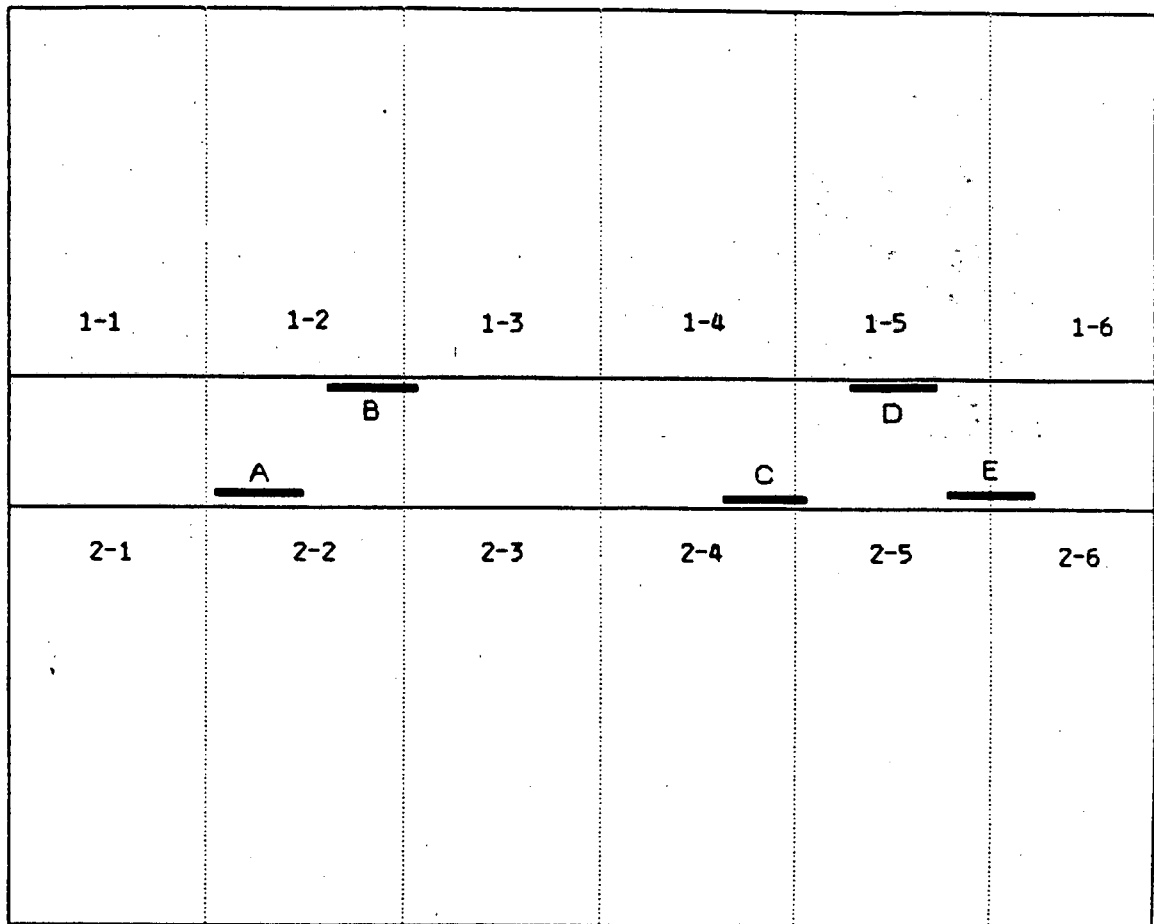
Section Layout for Scanning of Conoco Test Sample from Outside
